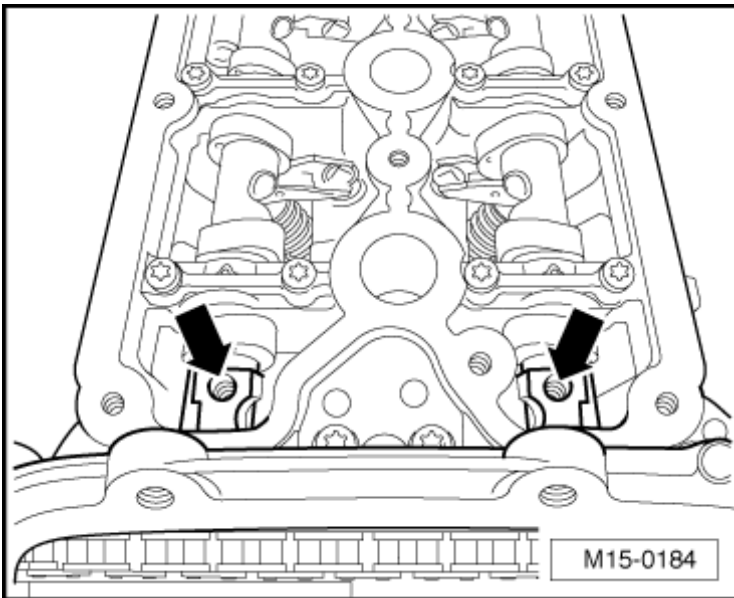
Identifying Camshafts Inserted Correctly Into Guide Frame
